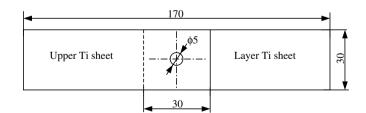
Dimensions of resistance spot weld specimen (mm).
